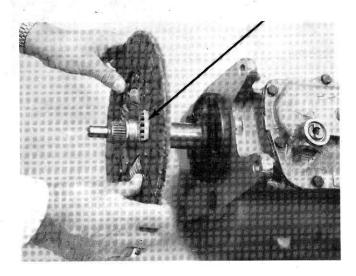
Lapping the clutch disc on the clutch gear to remove any burrs.
